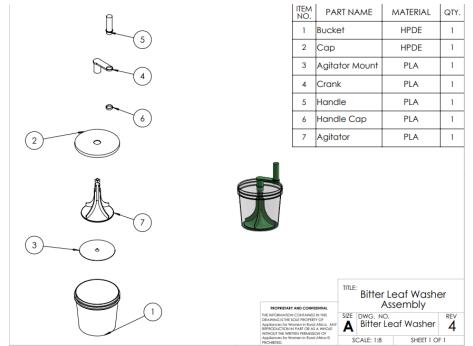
Assembly drawing of washer device (see Appendix I, Figure I1).
